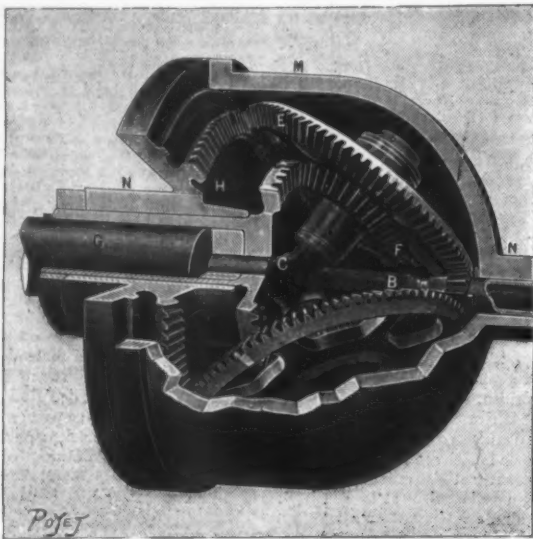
THE HUMPAGE GEARING FOR REDUCING ANGULAR VELOCITY.
